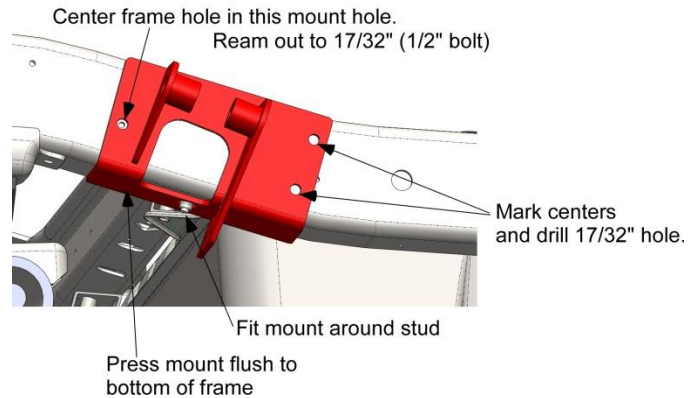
Upper Strut Mount Drilling (Left Hand Shown).
